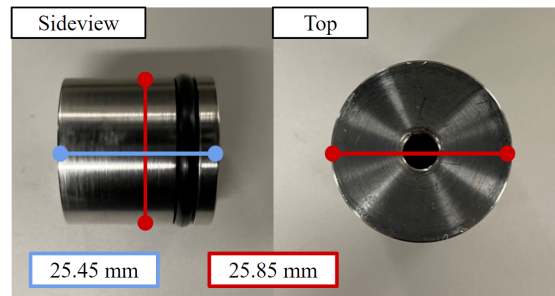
The small piston that can be inserted inside the pressure vessel tube (from the bottom) shown from the side (left panel) and top (right panel) with dimensions in blue.
